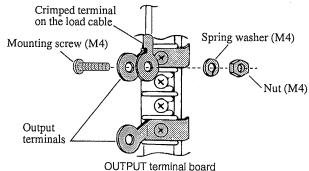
Connection to the rear OUTPUT terminal board of the PAN16-18, PAN16-30, and PAN35-20
